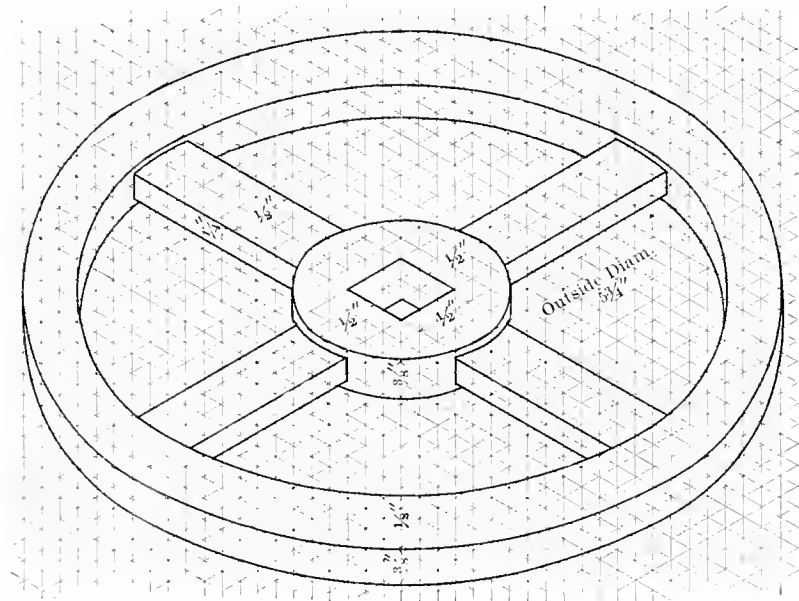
Spoked Wheel Drawn on Isometric Paper.
